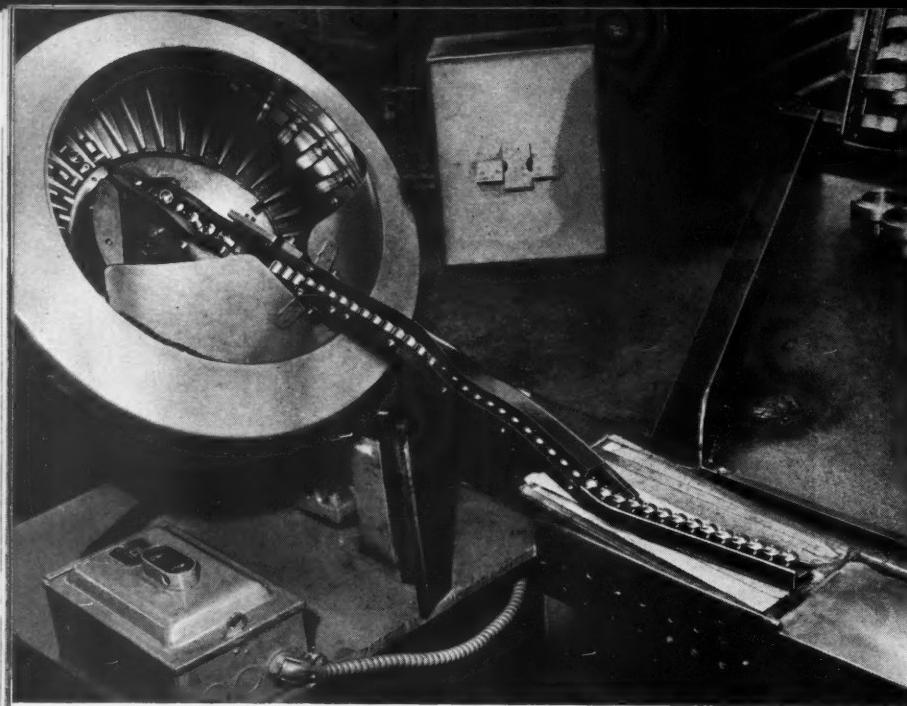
Visual inspection of hole drilled in the domed end of push-rod caps is facilitated by the hopper illustrated, which feeds the caps—domed end up—across the inspection table
